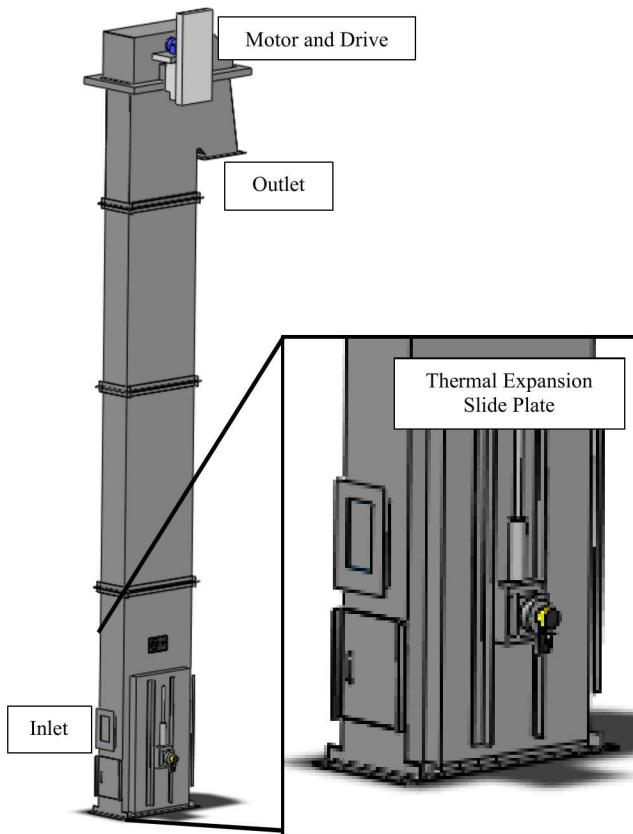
Bucket elevator CAD figure with dimensions on inlet
